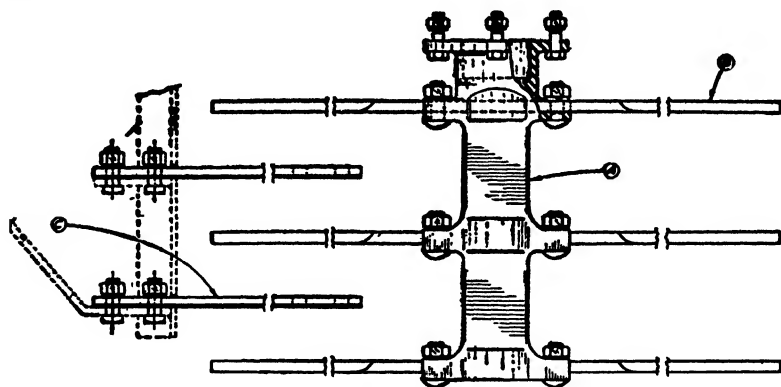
Knife head for three rotating horizontal knives passing between stationary side knives. (Servis Equipment Co.)
